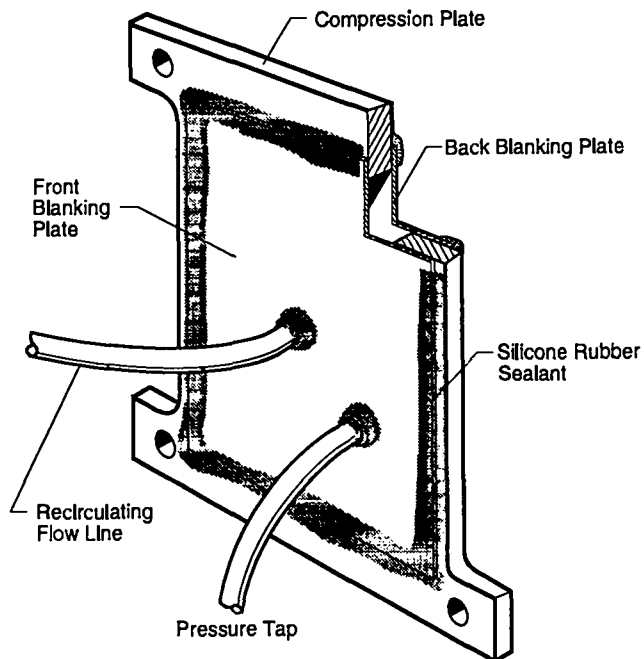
Cut-away drawing of compression plate sandwich used to assure seal of the front blanking plate to the compression plate.
